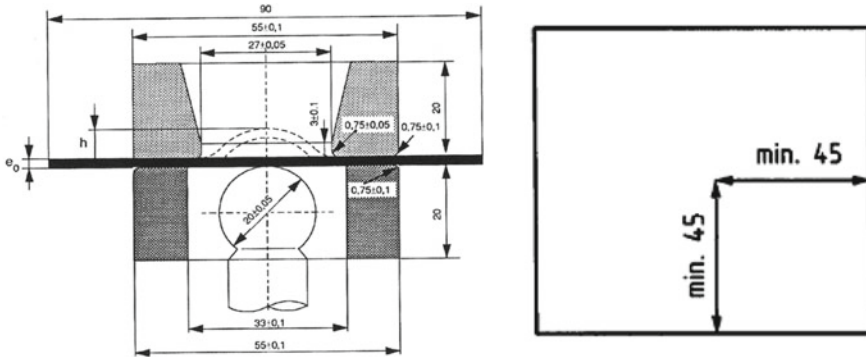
Erichsen test: dimensions of the tools and the specimen
